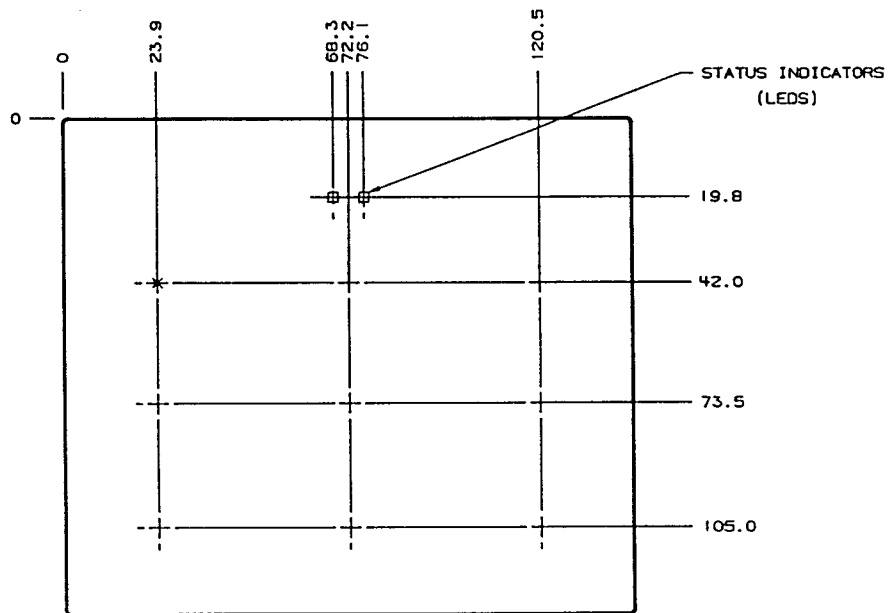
Front Panel 9 Component Gridwork, 3/8 Module
